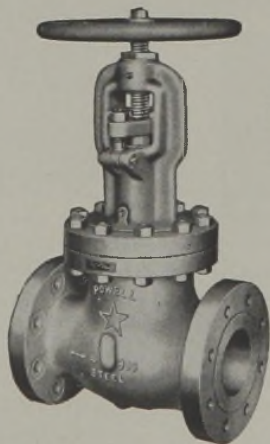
Class 300-pound Cast Steel Globe Valve, with flanged ends, outside screw rising stem and bolted flanged yoke bonnet.
